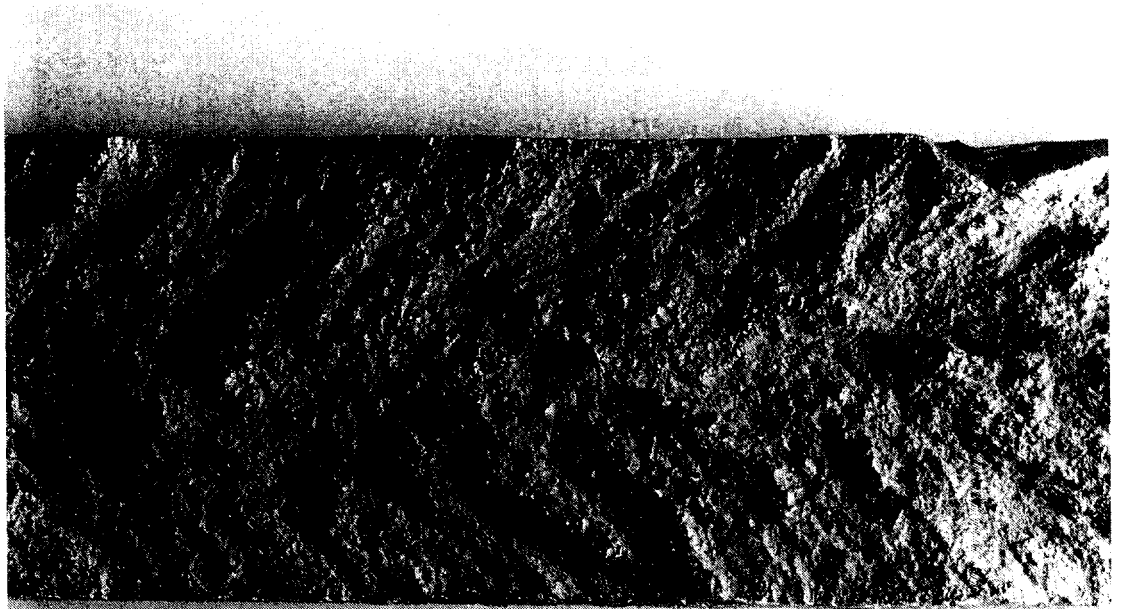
CHEVRON MARKINGS ON A BRITTLE FRACTURE OF A PLATE
